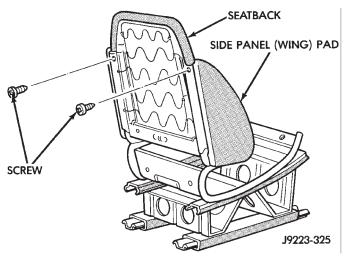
Side Panel (Wing) Pad Installation—Wingback Seat
